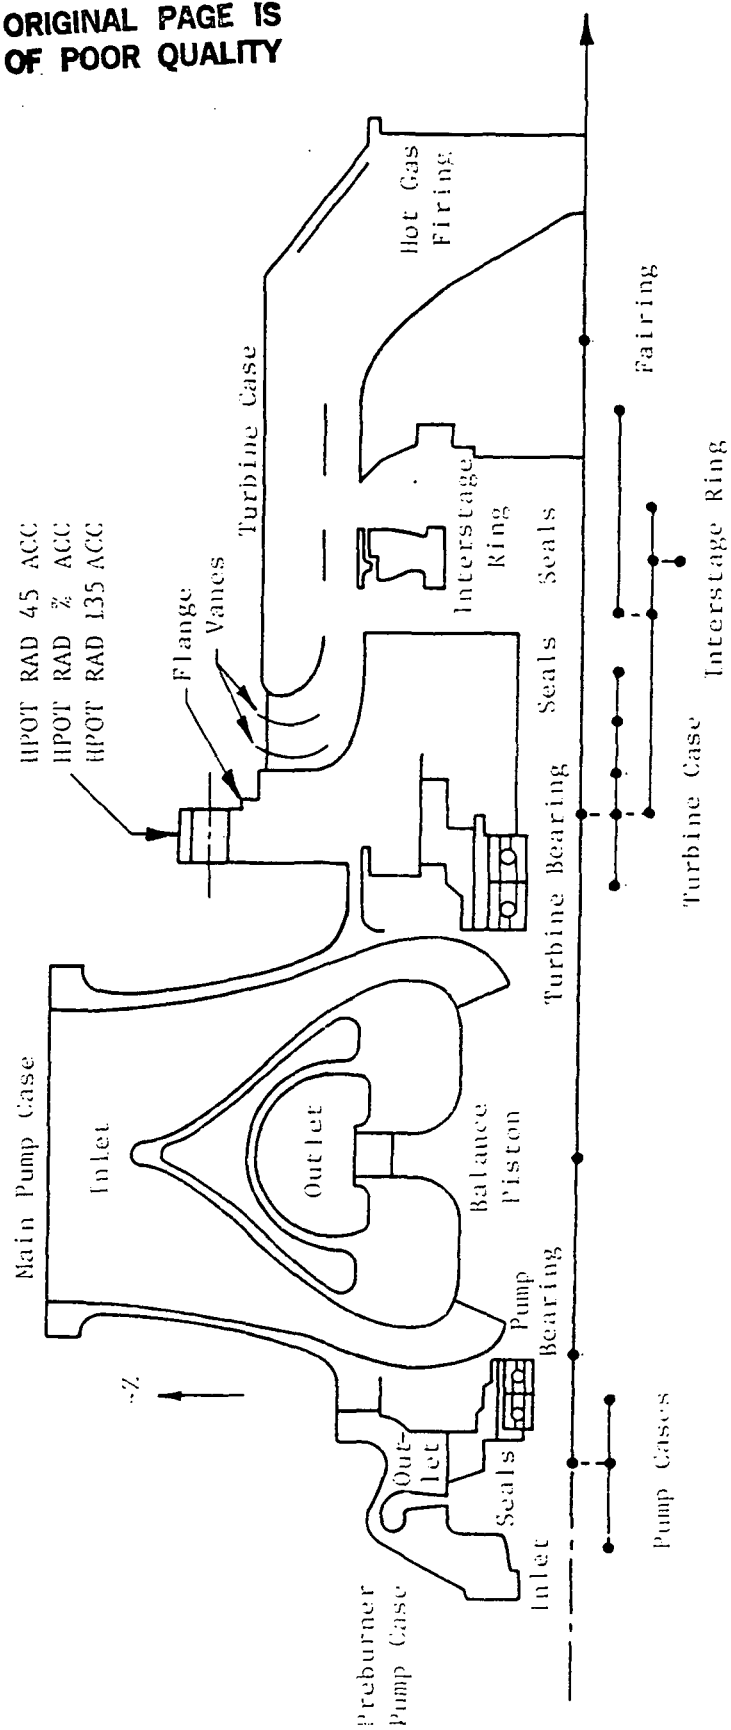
Location of Accelerometers Sensing Turbine Bearing
